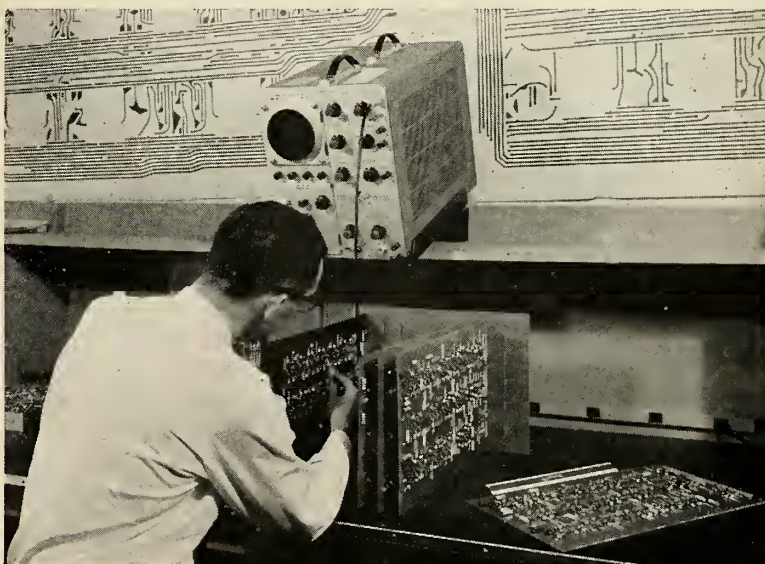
Technician checks plug-in modules prior to assembly on plug-board.
